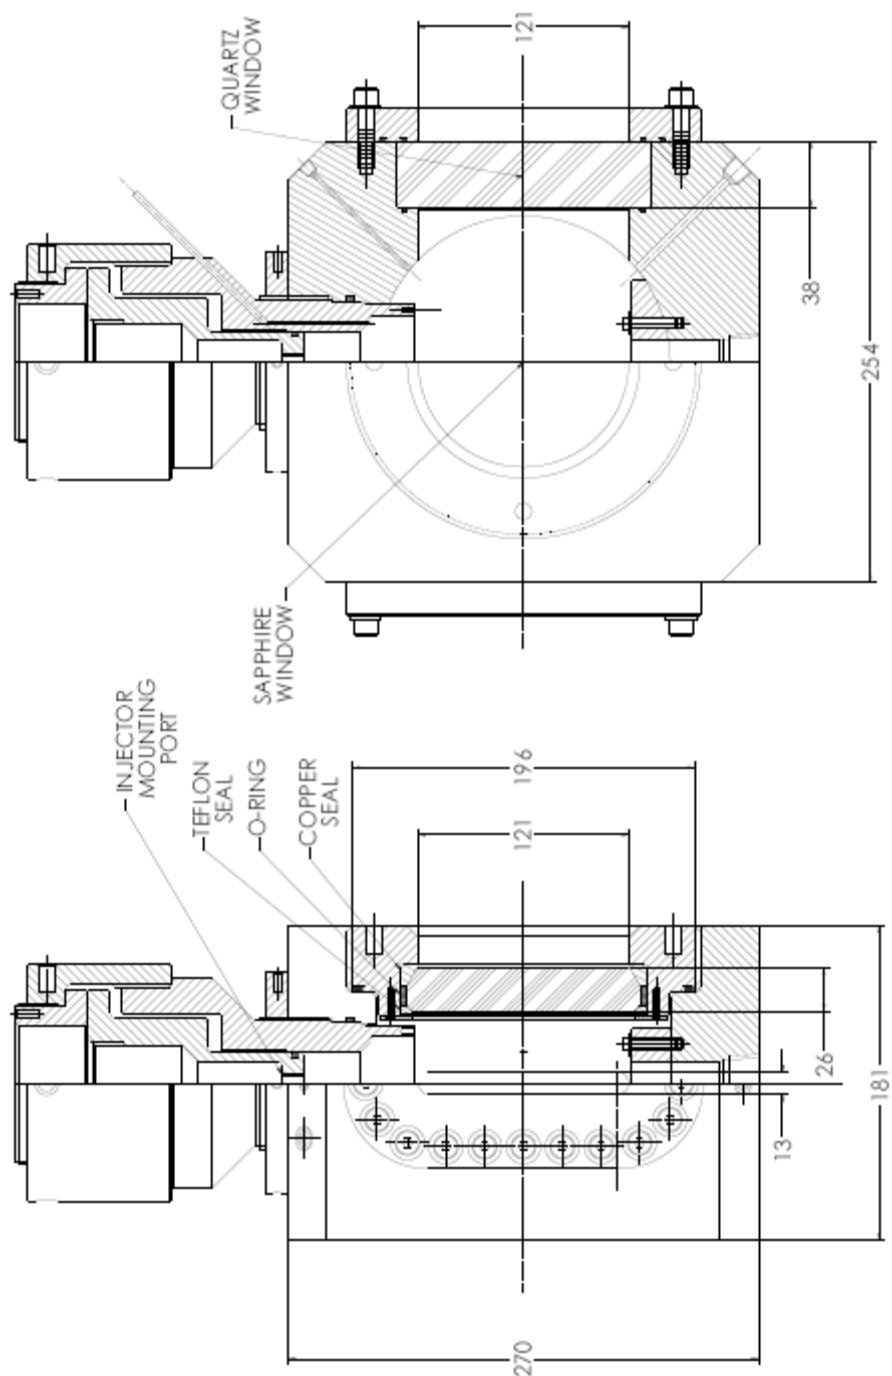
Drawing of Main Chamber. All dimensions are in mm and approximate.
